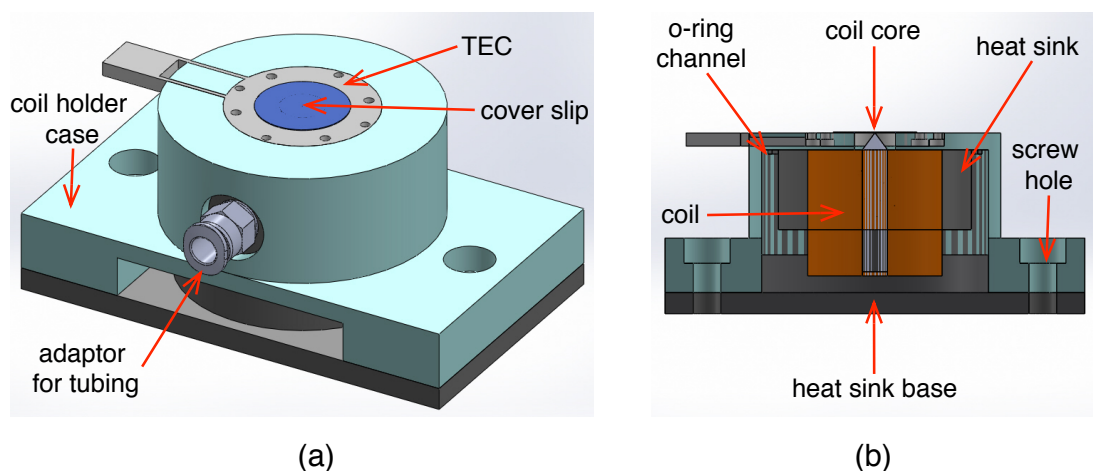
Designed AFM coil and sample holder for AFM body that allows applying translational force on magnetic micro-particles a) isometric view, b) Cross-sectional view.
